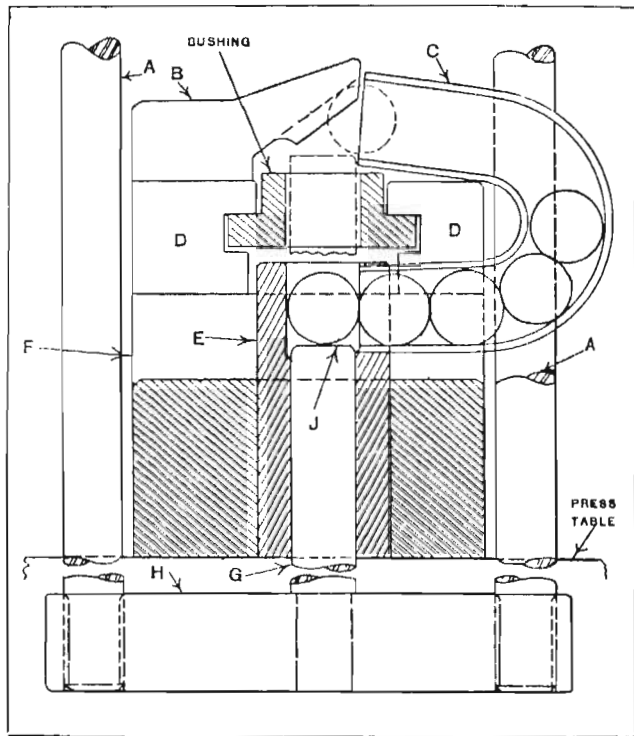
Simple Press Fixture for Automatically Burnishing Bushings
